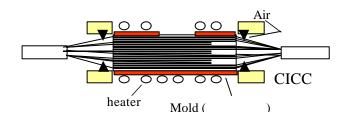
Schematic drawing of mold assembly for strand-to-strand joint
